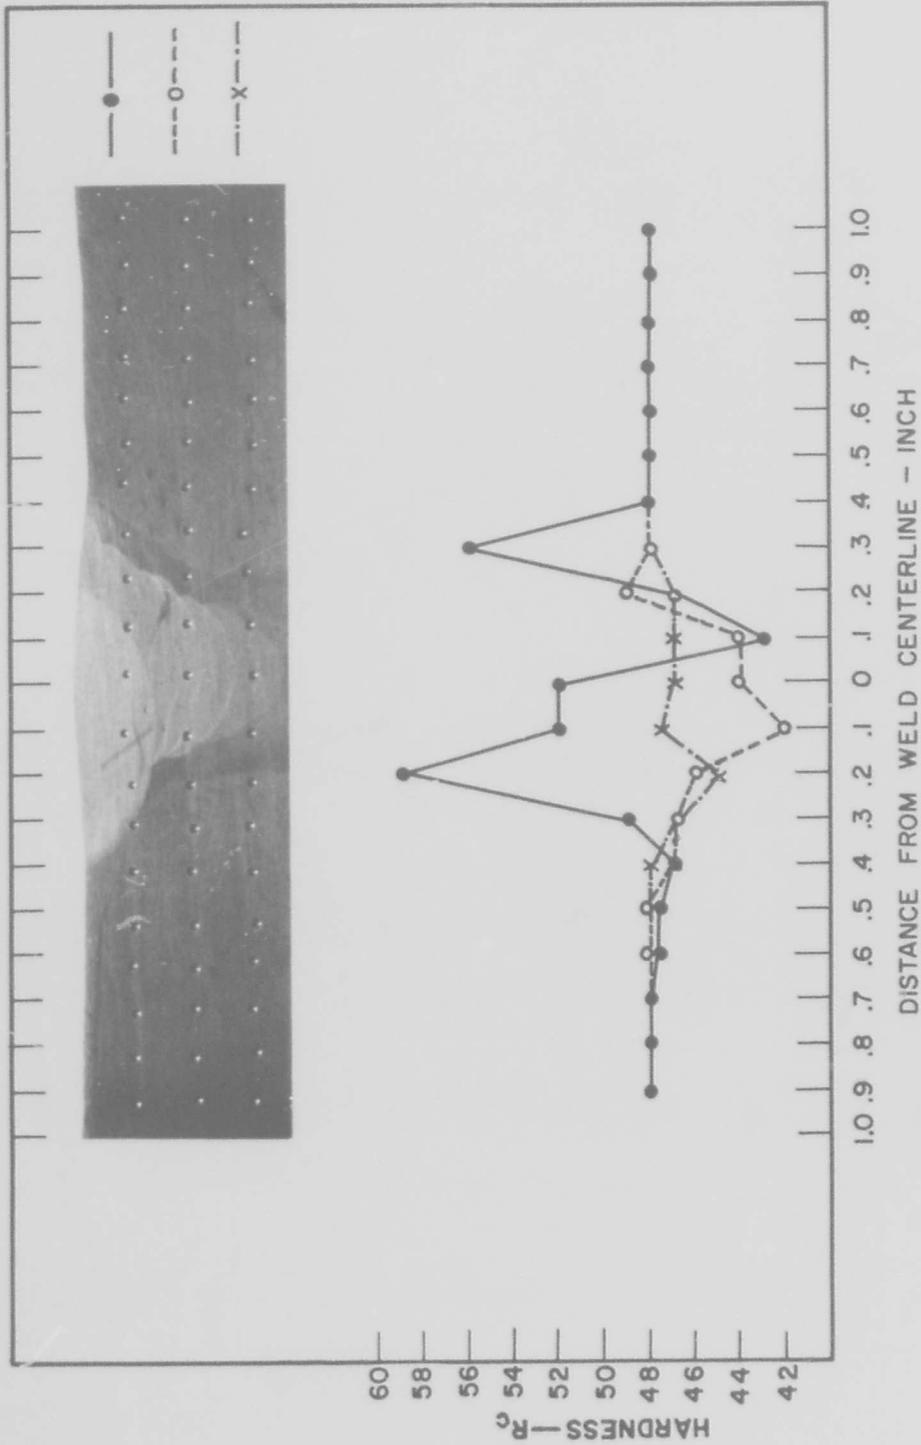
Hardness Survey of TIG Weld No. S299 Made in D6AC Plate at 10 ipm Using Helium Shielding, Filler Wire No. 1, and No Preheat.
